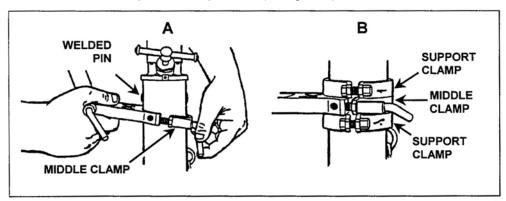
Attaching the Middle Clamp to M4 Pedestal
